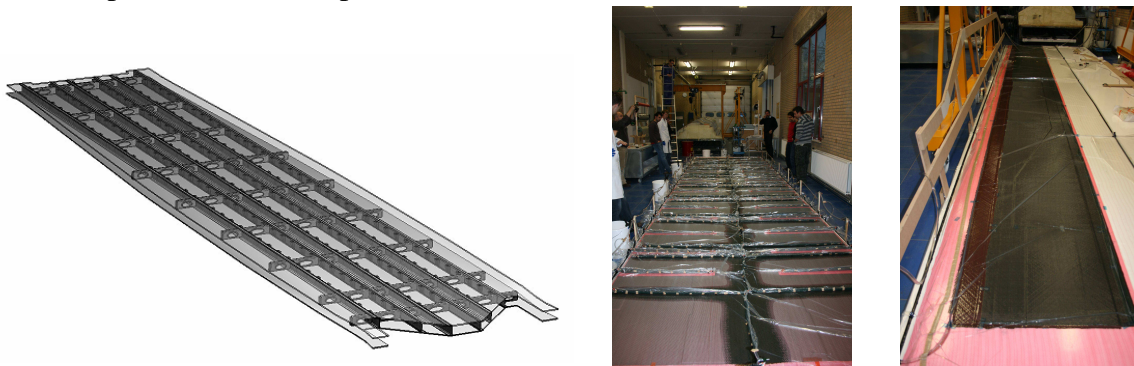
Floor assembly design (showing the top and lower plate, the 6 longitudinal beams and the 16 transversal beams) and the manufacturing of the top and bottom plates by vacuum infusion.
